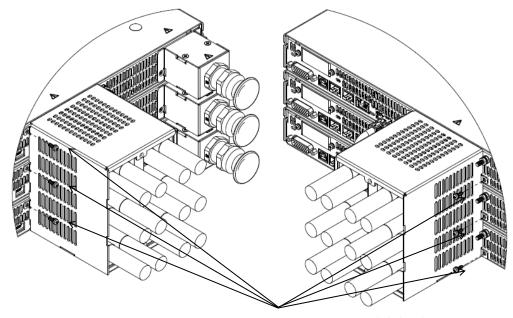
Three 10V Units Bus Bar Insulator Assembly
